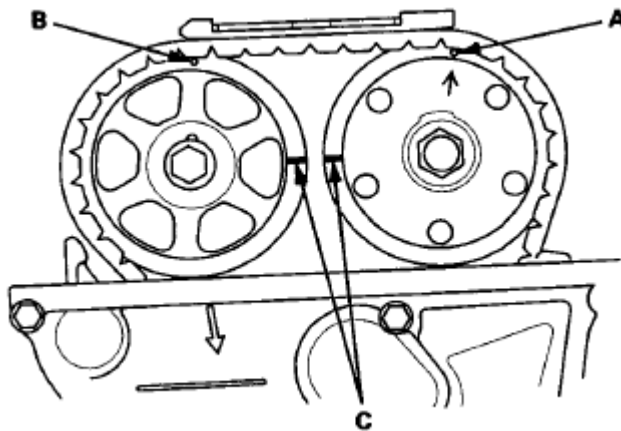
Punching Mark On Variable Valve Timing Control Actuator
